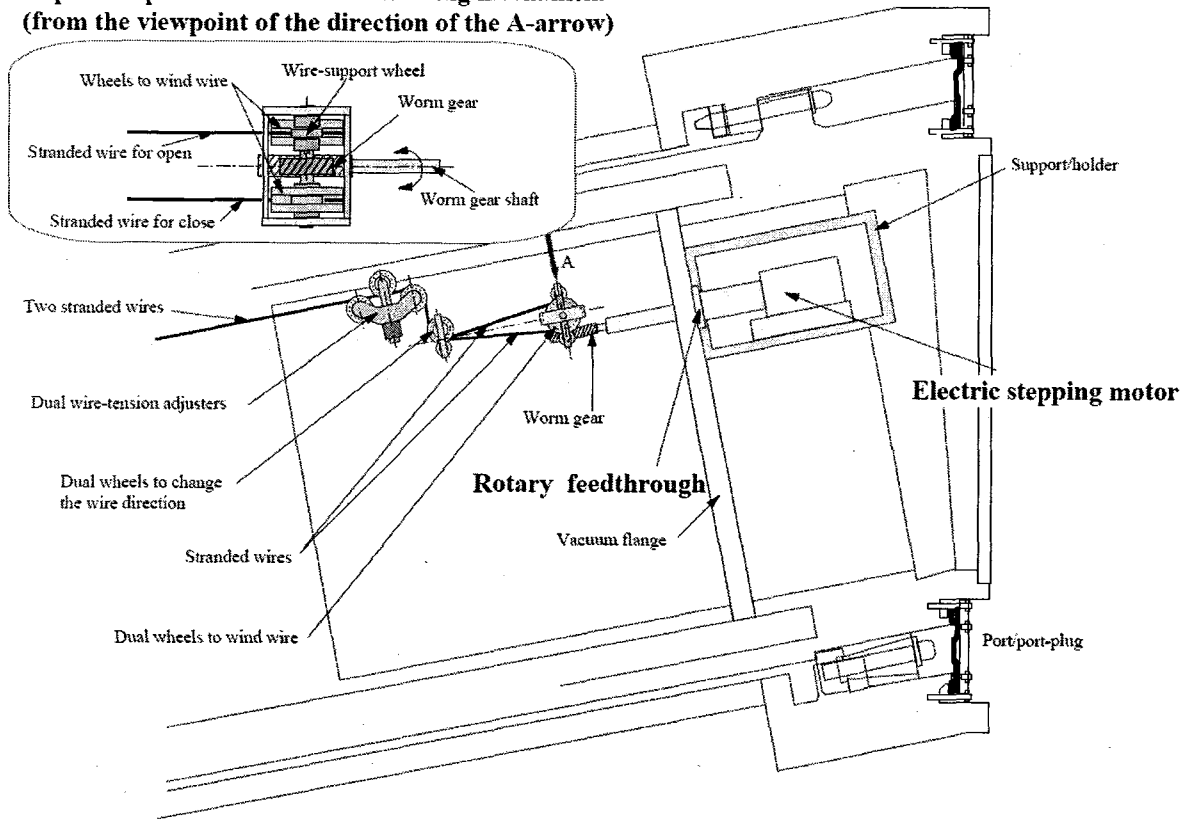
(c) Schematic diagram of the wire-winding mechanism, rotary feedthrough, electric stepping motor, etc., which are the parts of the driving mechanism of the shutter.
